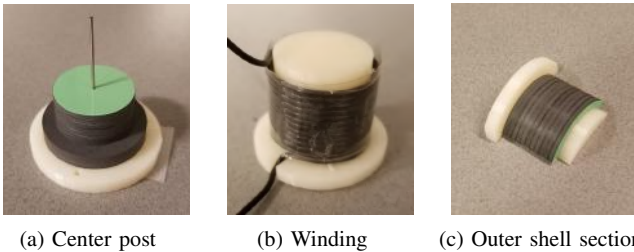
Construction of the prototype inductor using custom 3D-printed fixtures (white).
